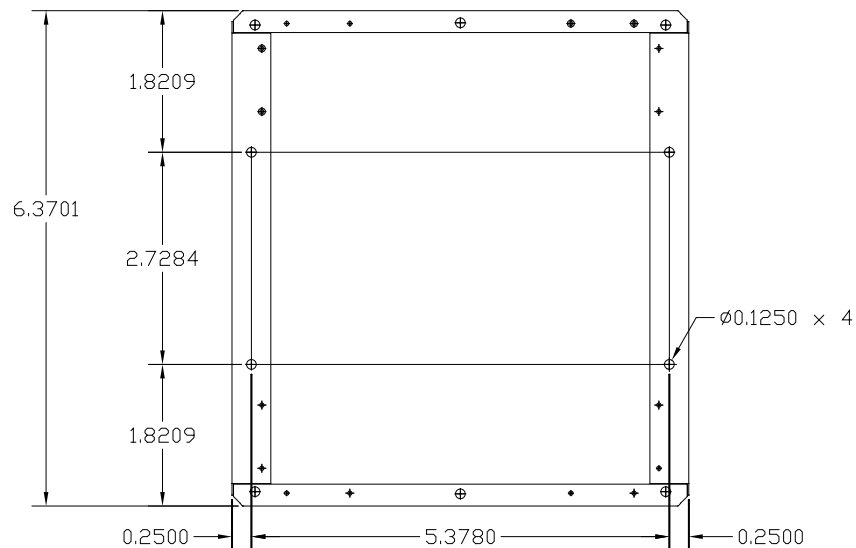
Mounting hole pattern (dimensions in inches)
